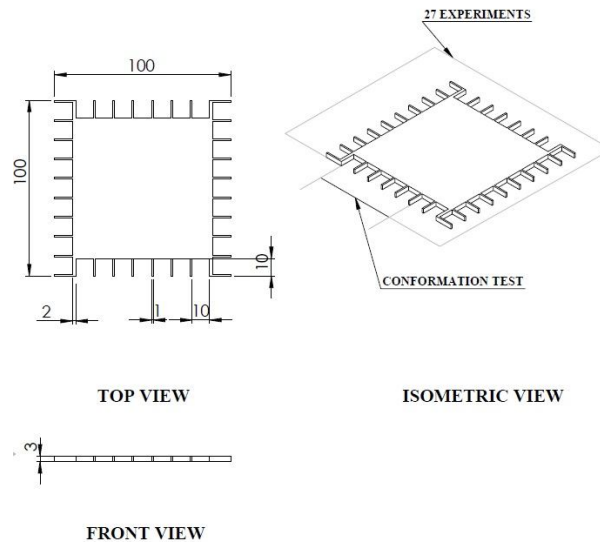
Different views of part Inconel 625 plate from the drawing sheet.
